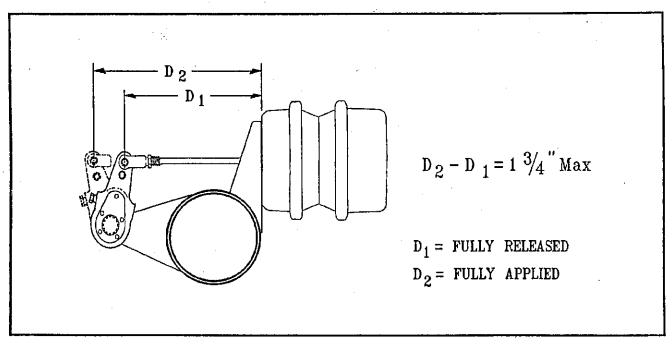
CHECKING BRAKE ADJUSTMENT
